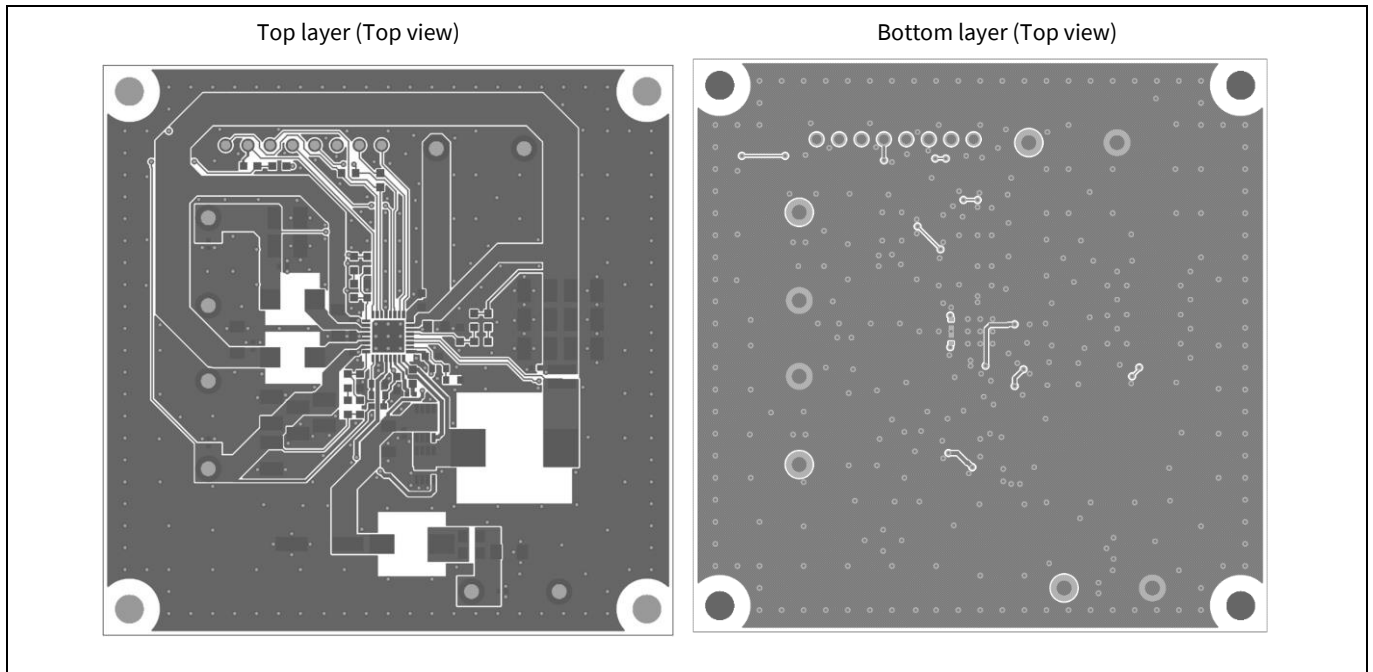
Layout example of 2-layer PCB (S6BP502A)
